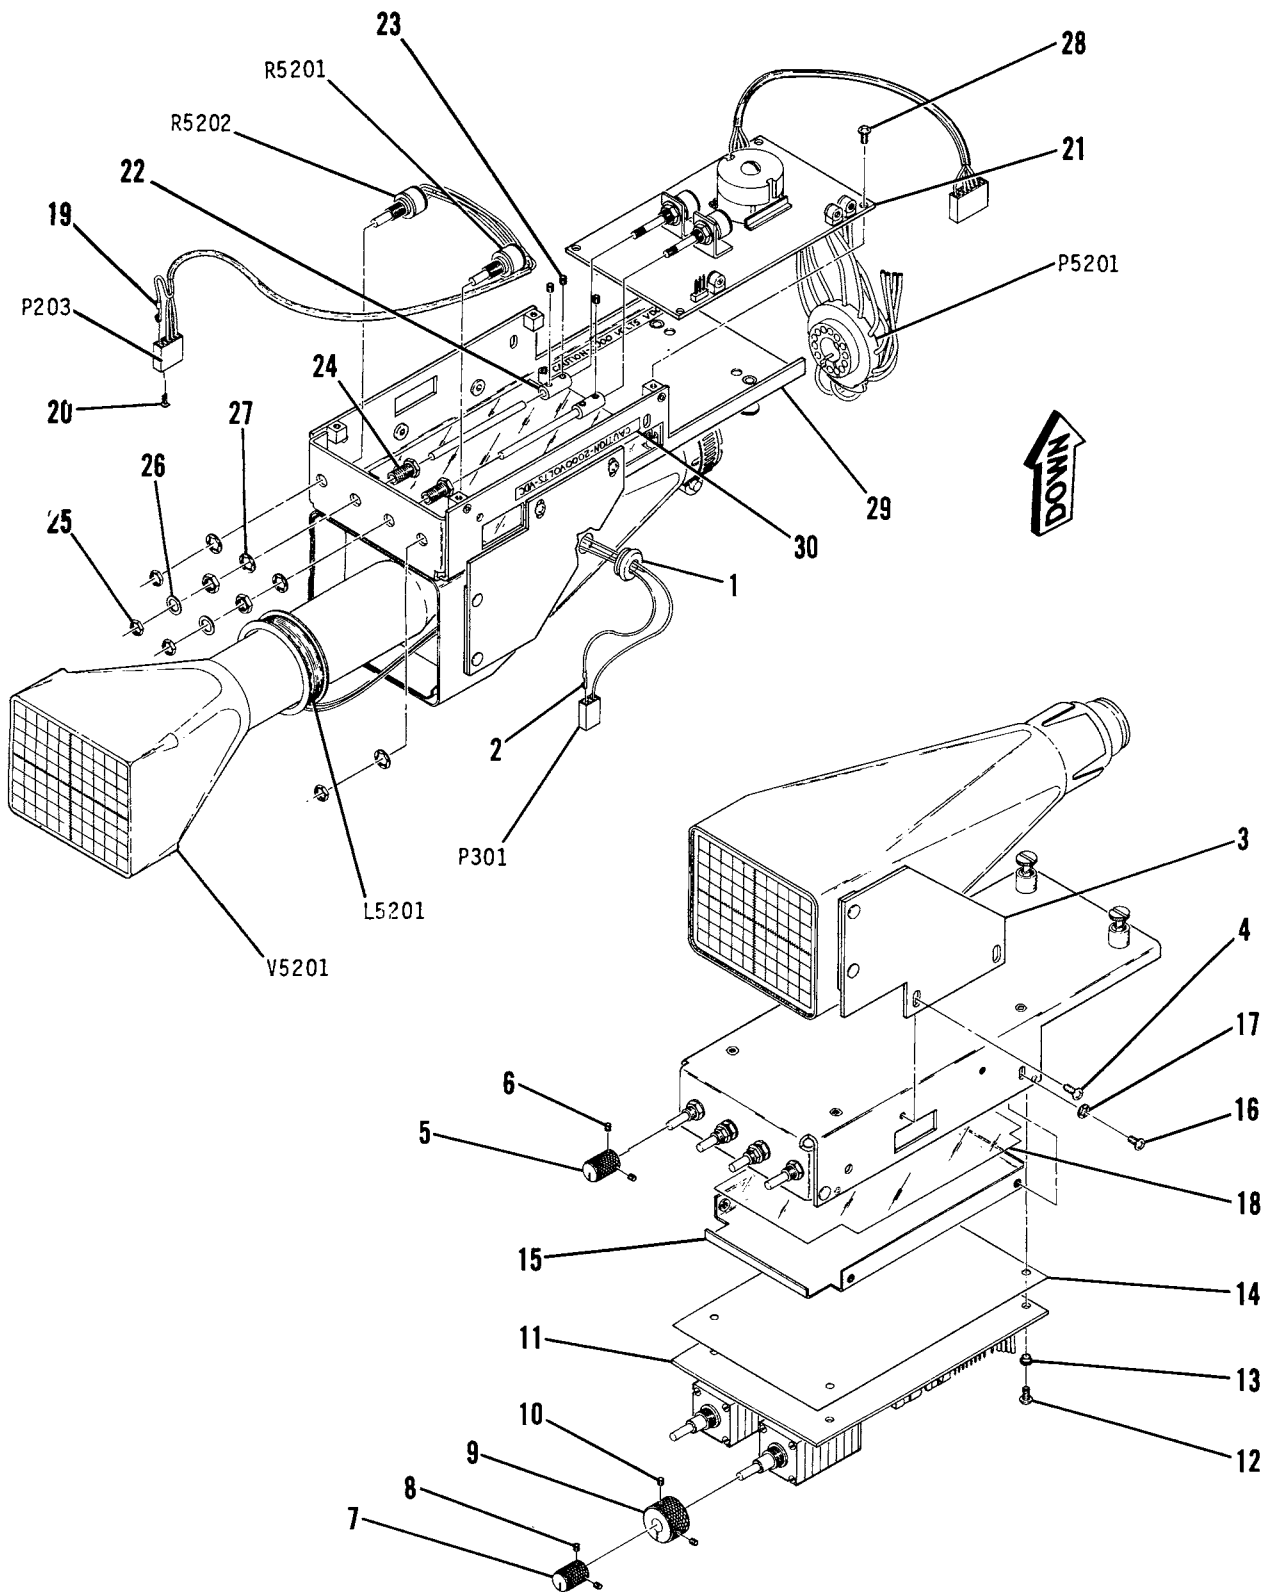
SCOPE POWER AND CONTROL ASSEMBLY
